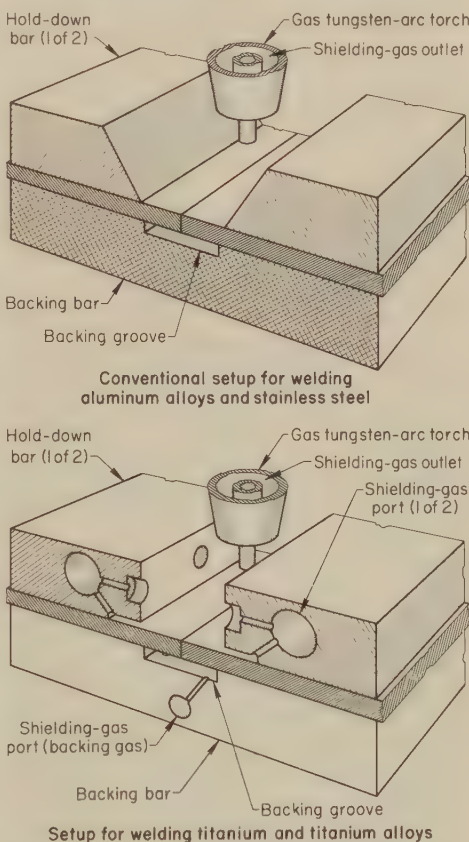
Typical setups for inert-gas shielding for gas tungsten-arc welding
